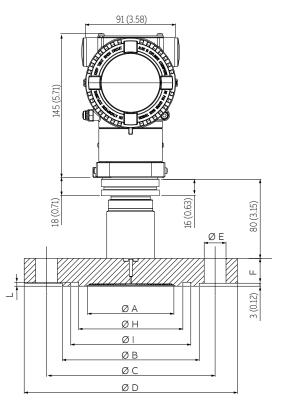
266HRH/266NRH with barrel housing and direct mount seal S26FE fixed flange Raised Face EN 1092/1 Form D (For dimensions of S26 seals refer to the S26 datasheet)
